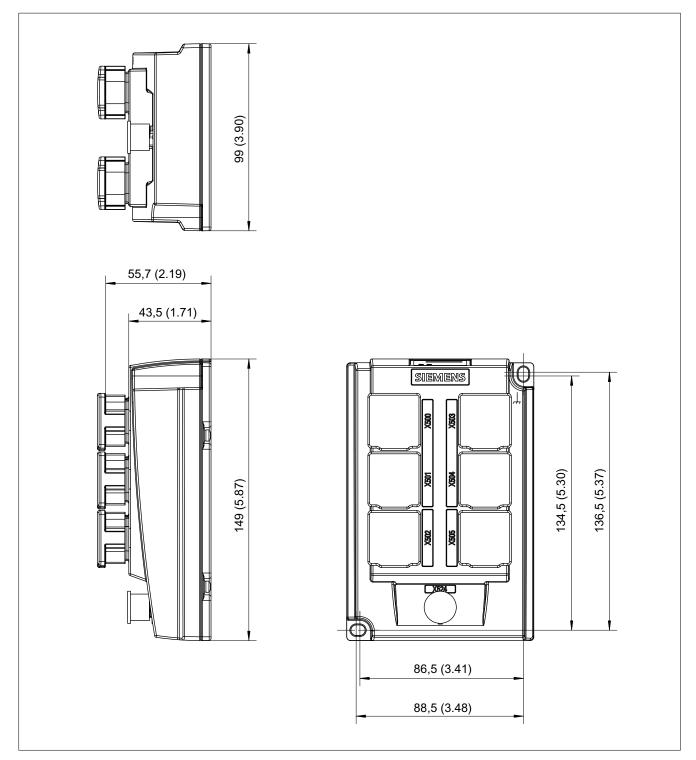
Dimension drawing of the DRIVE-CLiQ Hub Module External DME20, all data in mm and (inches)
